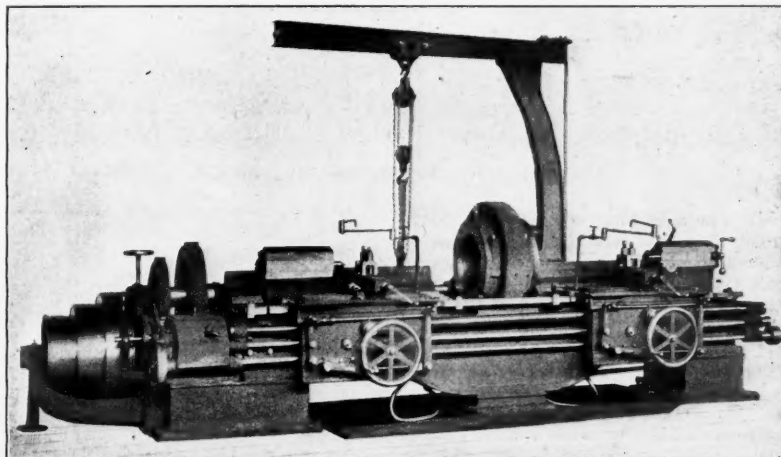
The Lodge and Shipley Double Axle Lathe.
